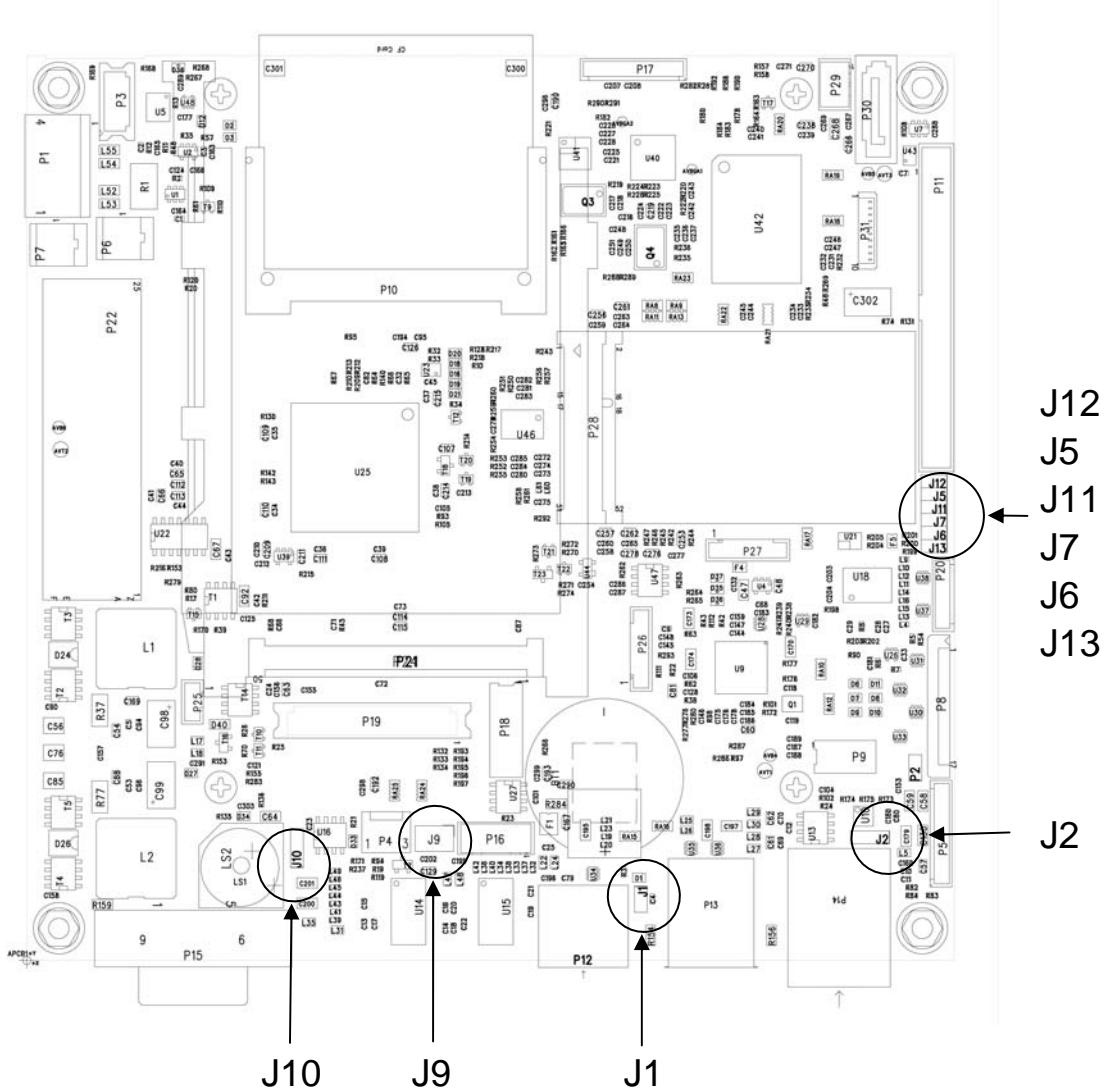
Jumper layout, motherboard MPC6.20 06.2006
